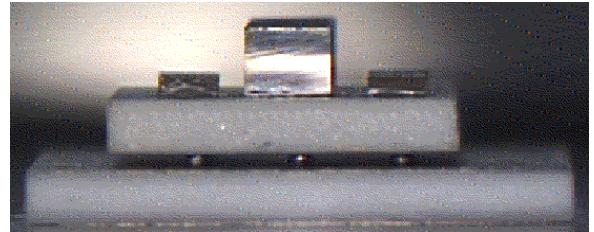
ETL MMIC μ BGA flip-chip assembly (side view of figure 3).
